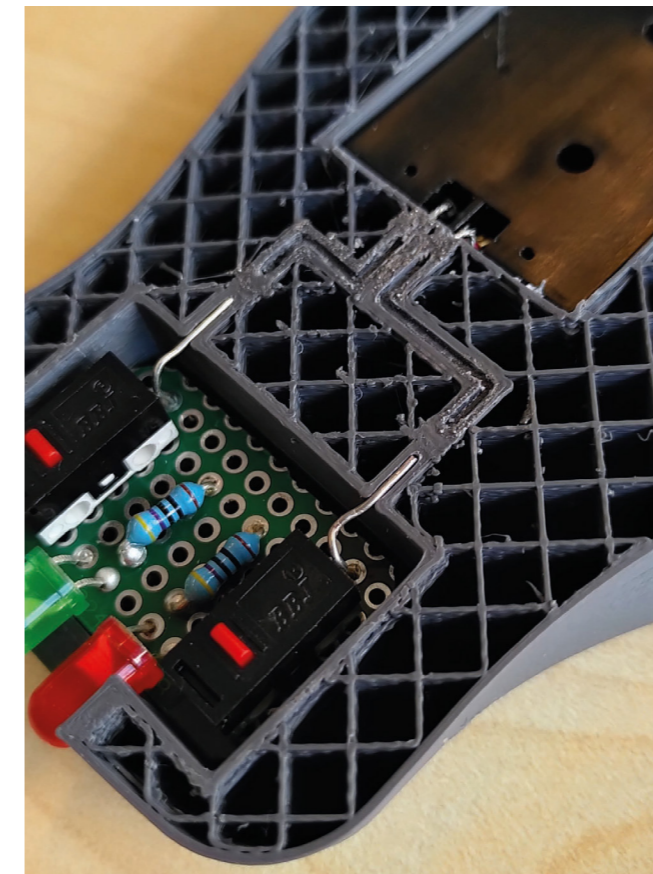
Integrated electronics using FDM and solder paste extrusion by Eekhout, K.
